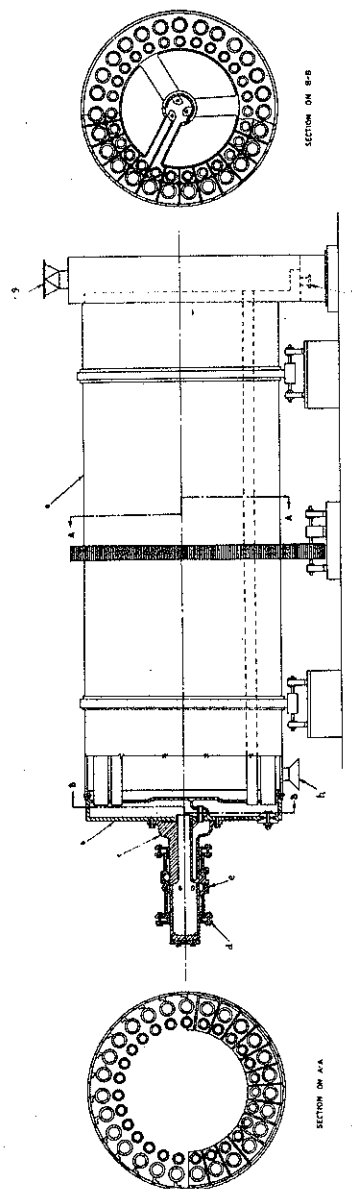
Steam heated rotary dryer (a) shell (b) steam manifold (c) steam neck (d) gland (e) steam inlet (f) condensate (g) feed hopper (h) discharge hopper
